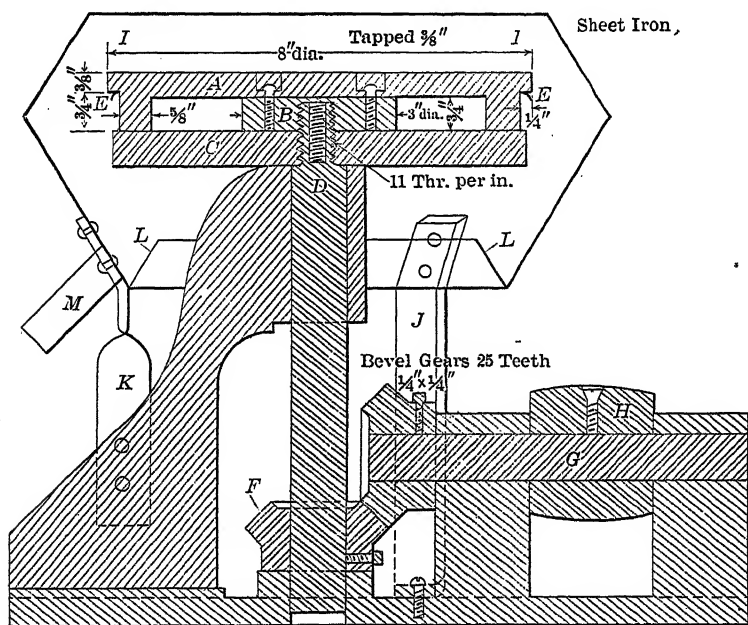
SECTION OF GRINDING- AND POLISHING-MACHINE.
